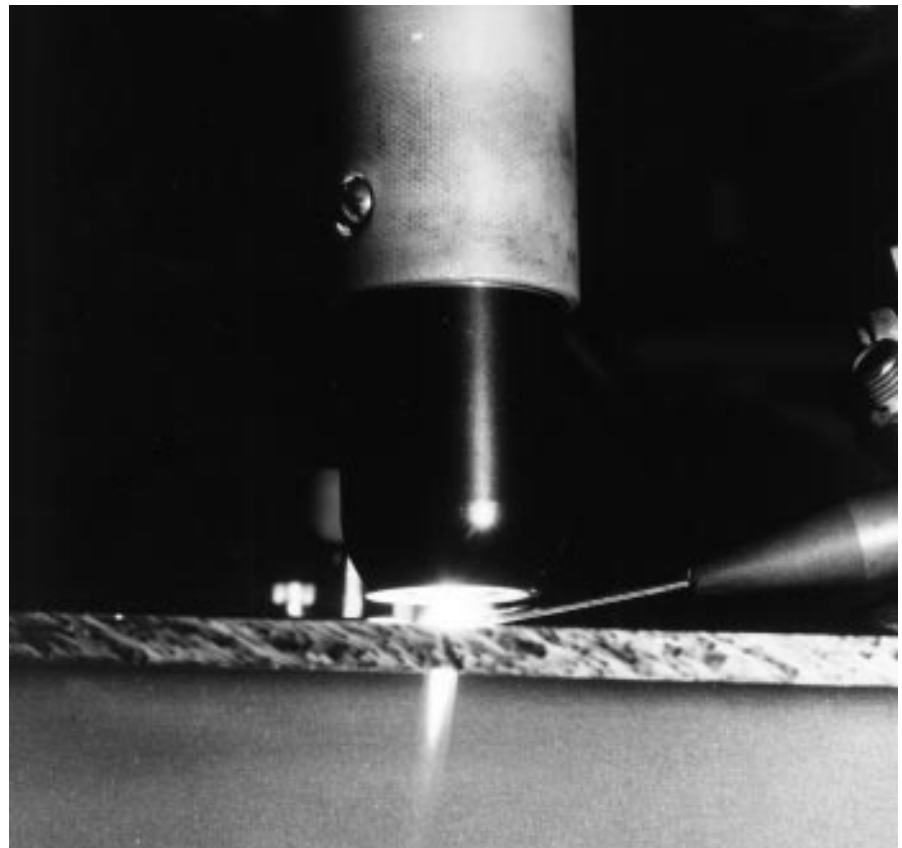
Vertical welding tool of the Productivity Enhancement Complex.
